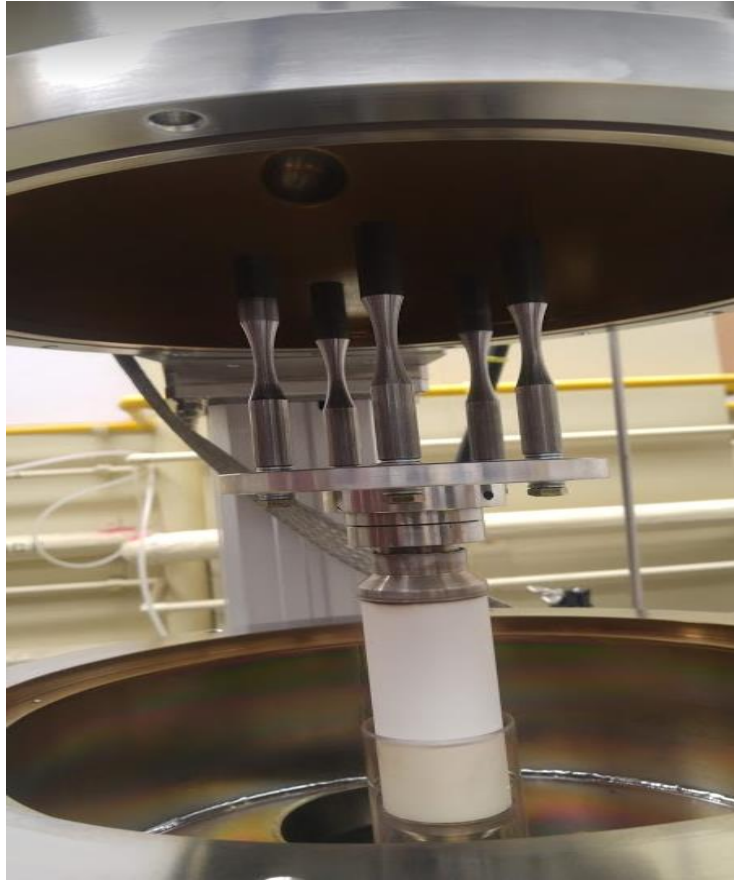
Fatigue samples installed on a specimen holder and loaded into the Plasmonique vacuum chamber.
